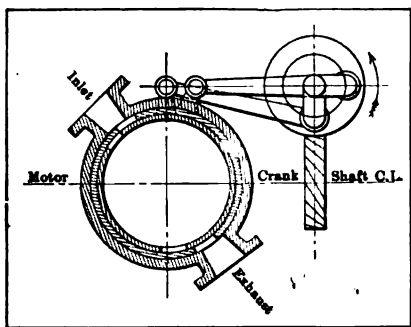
Horizontal section through motor cylinder, showing oscillating double-valve system
